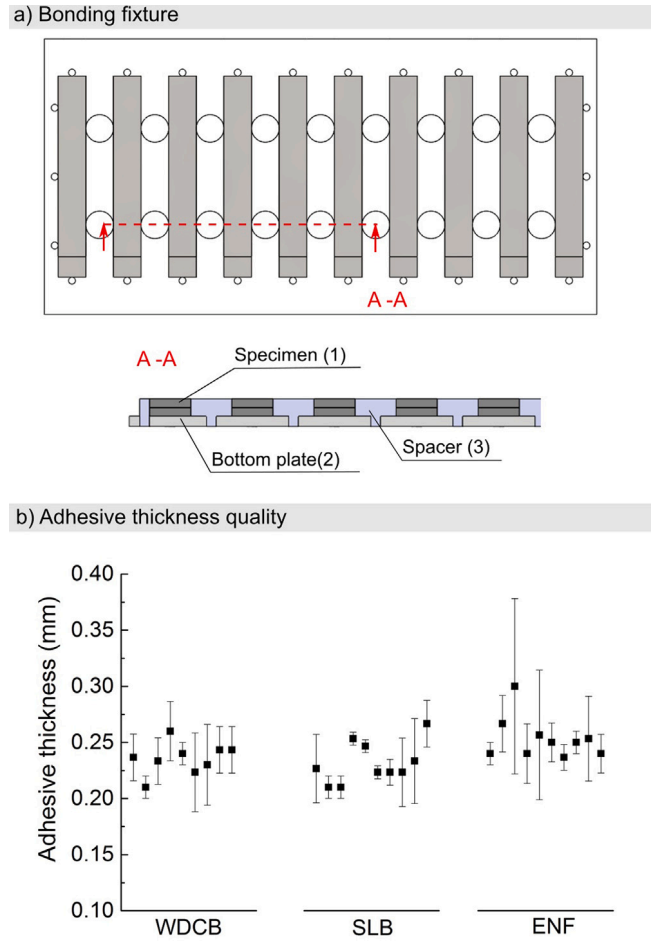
Demonstration of the (a) used bonding fixture to manufacture the specimens and (b) the adhesive thickness qualification for each fracture mode individually.
